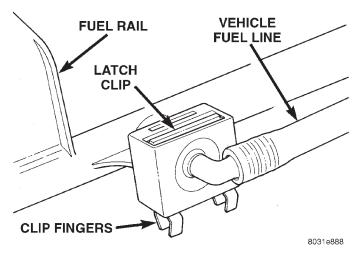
Latch Clip—5.2L/5.9L EnginesWithout Fuel Test Port
